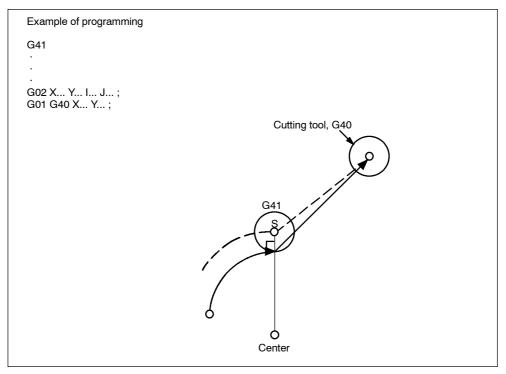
Canceling the offset mode at inside corner (arc to straight-line)
